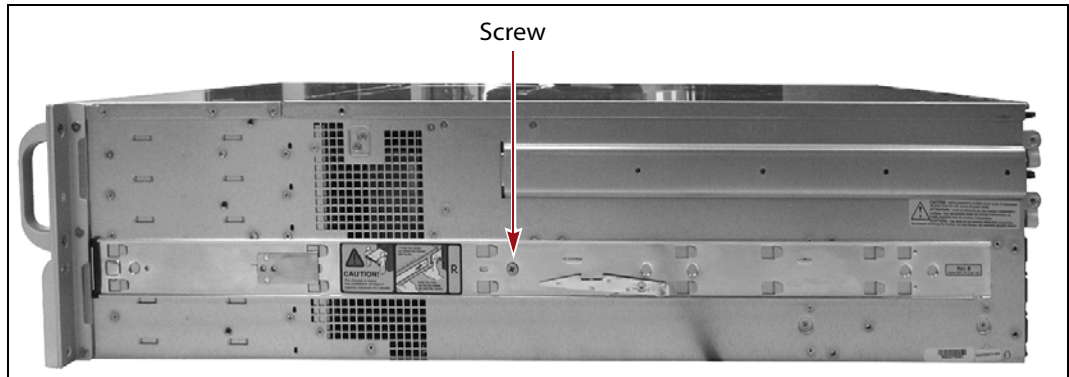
Install the inner rail screw on the Verde 4U chassis.
